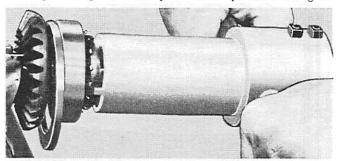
Installing Gear Lock Nut D. Reinstalling Shaft Assemblies
